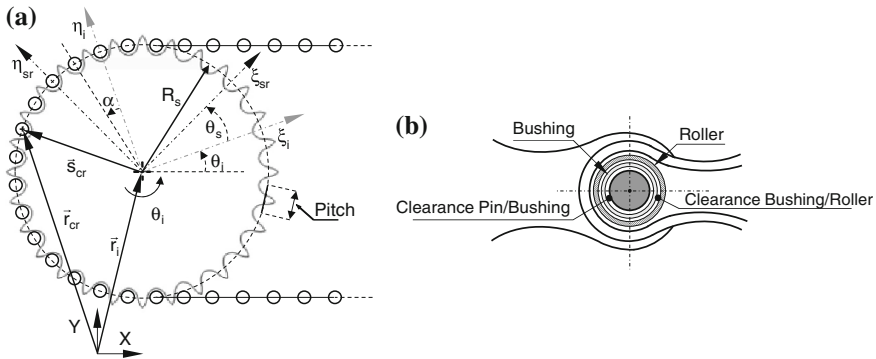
Multibody representation of a chain drive. a individual mechanical components, b pin, bushing and roller assembly
